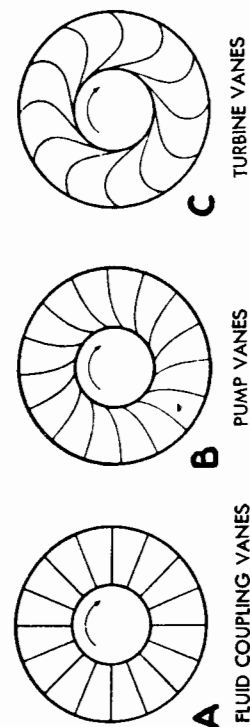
Vane forms for vanes mounted in torus members. A, straight blades may be used for driving or driven fluid coupling members; B, curved blades may be used for pump (driving) members; C, curved blades may be used for turbine (driven) members in torque converter.
